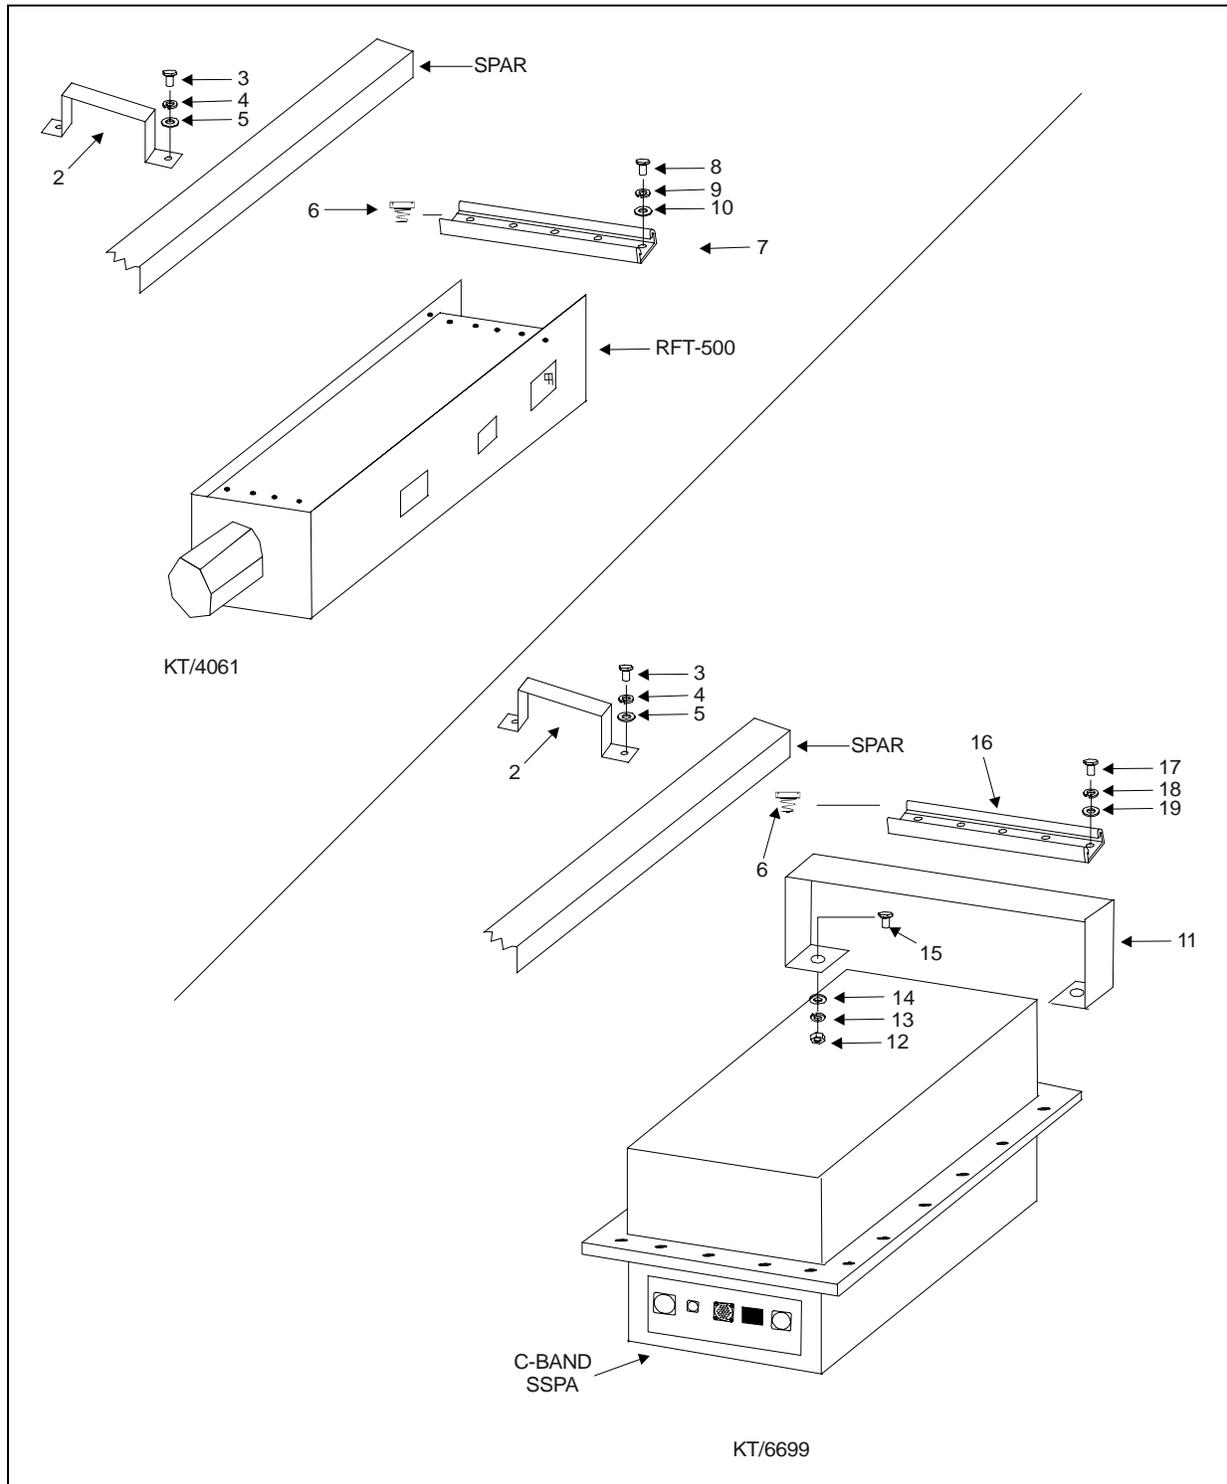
Exploded View of Spar Mounting Kit (Single Thread Configuration)
